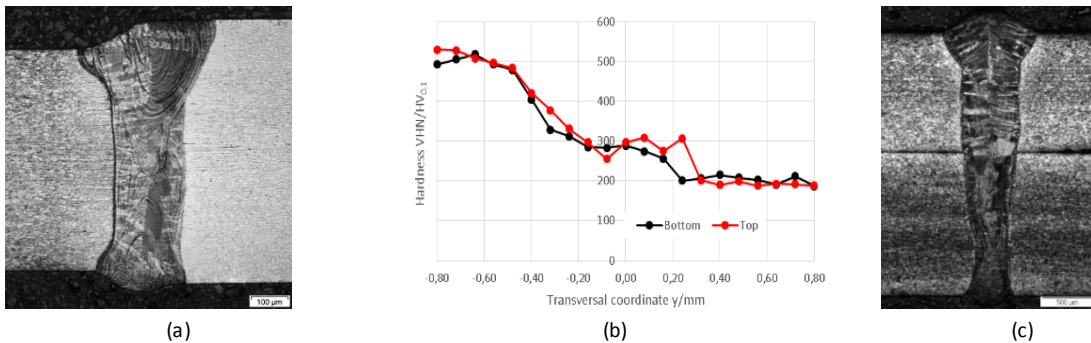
Dissimilar weld between 1.4678 and 1.4301: (a) Macro section of a square butt joint; (b) hardness plot across the weld zone; macro section of a lap joint
